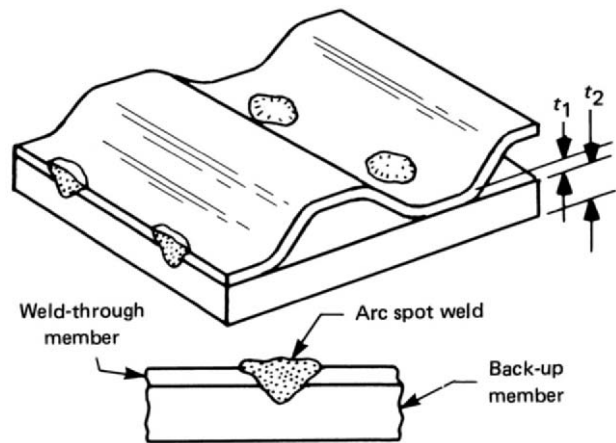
ARC-SPOT-WELDED TWO-LAYER ASSEMBLY
